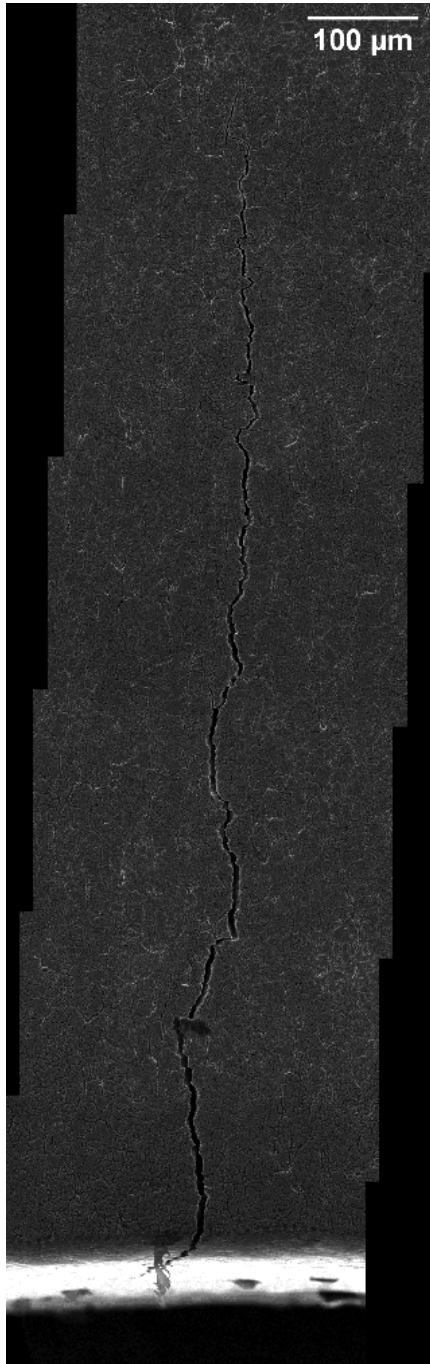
Crack on the surface of sample made of 1.4301 steel
